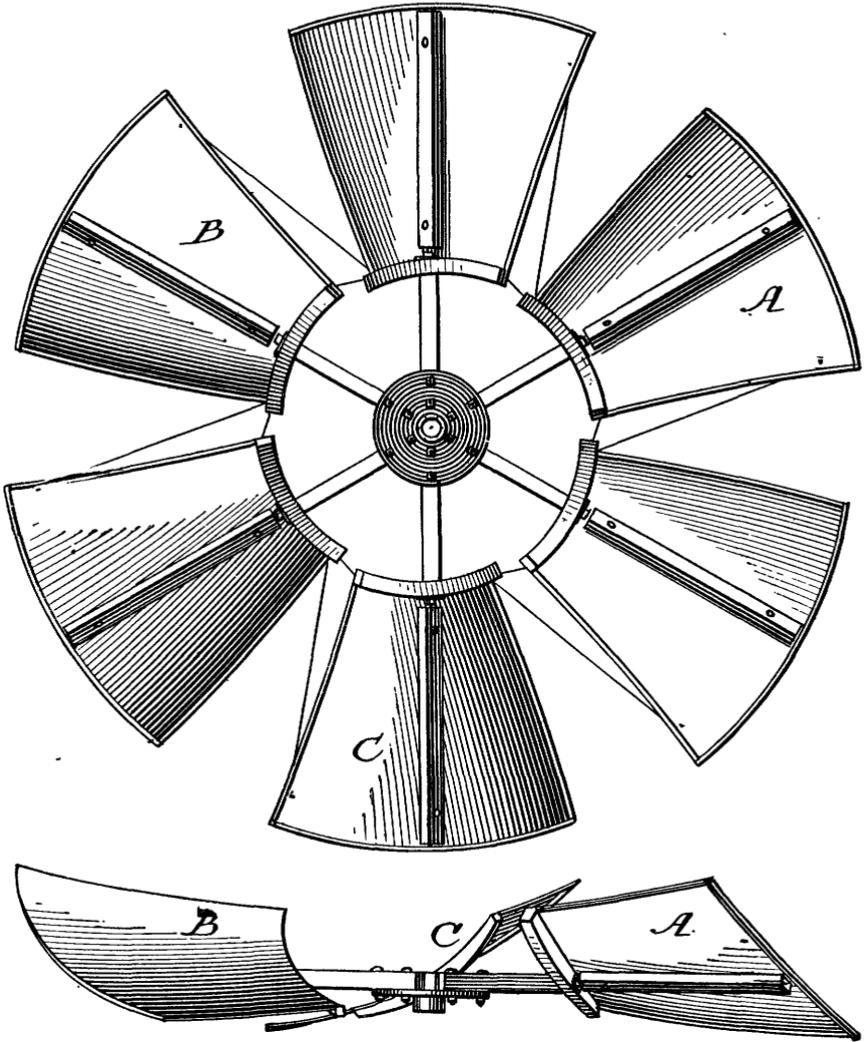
Elevation and section of wheel No. 61. (Sail area, 14.159 square feet; efficiency, 0.191.)
